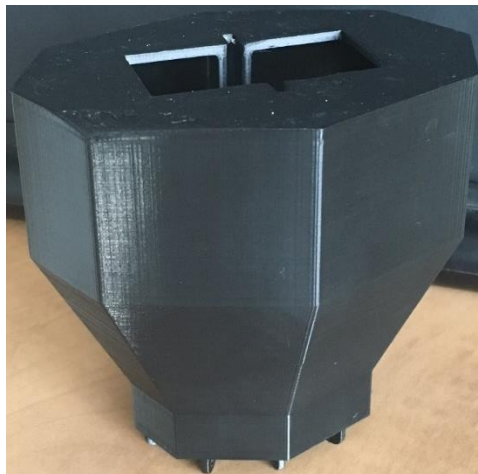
Rev 3, prototype of external mechanical structure.
